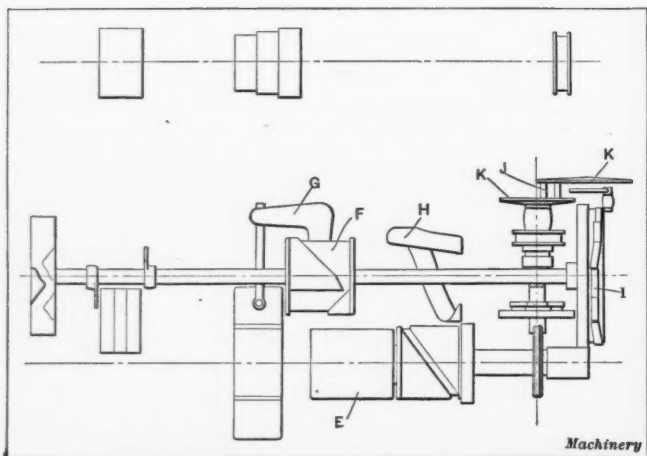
Setting up the Cleveland Automatic consists principally in shifting Adjustable Cams, setting Dogs, etc.
